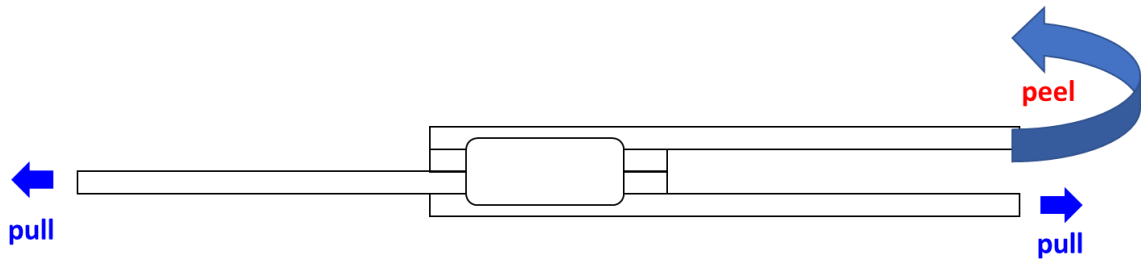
Schematics of mechanical testing for resistance spot welded 4T stack-ups
